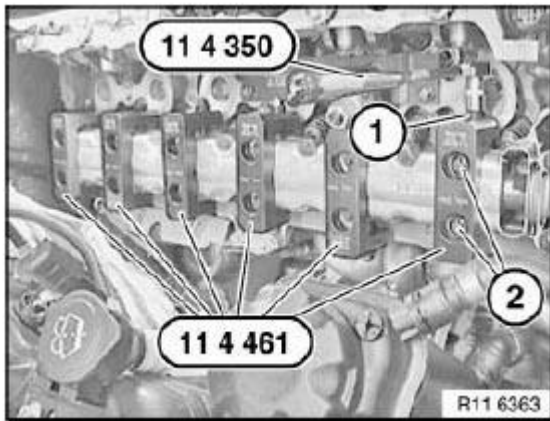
Special Tools (11 4 461) And (11 4 350)
